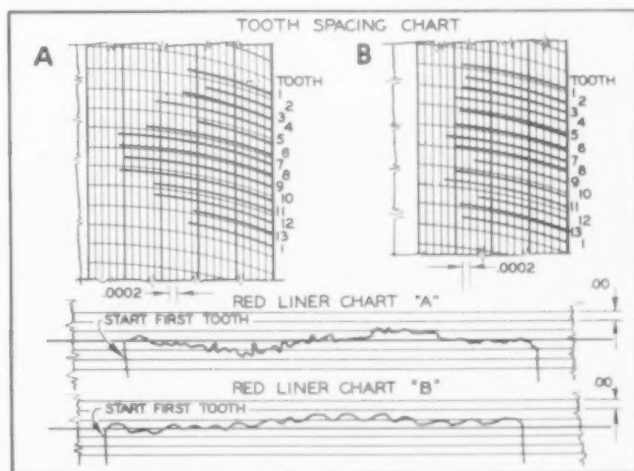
Chart A here indicates tooth spacing of a gear which is within limits for concentricity, but is outside the limits for tooth spacing. Irregular spacing causes additional tooth kick in portions of the gear. After shifting tool head, results are shown in Chart B, where tooth spacing is uniform.
